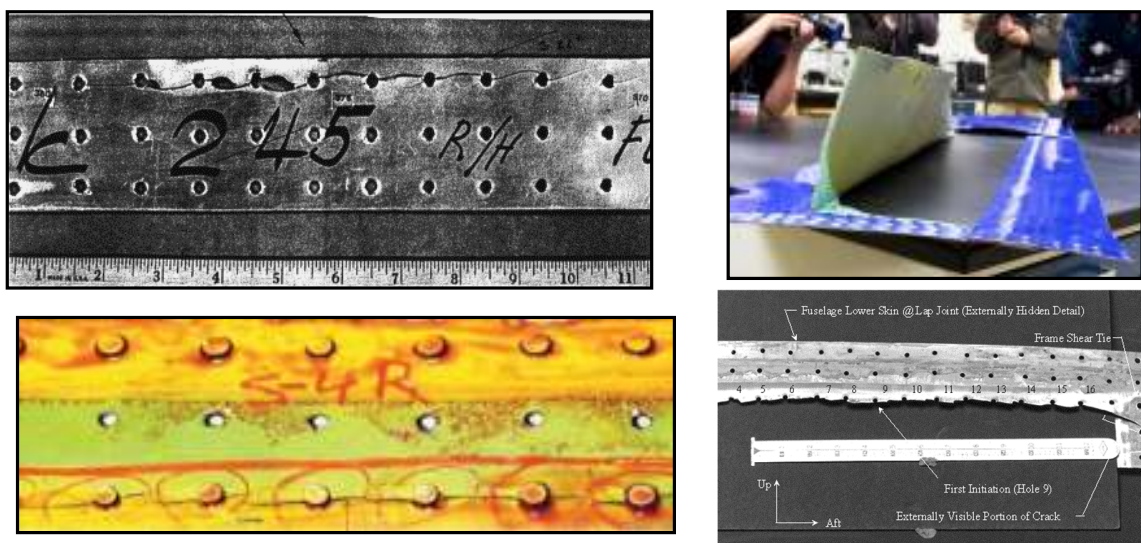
Typical MSD failures at fuselage lap-splice joints of Boeing 727 and 737 aircraft.
